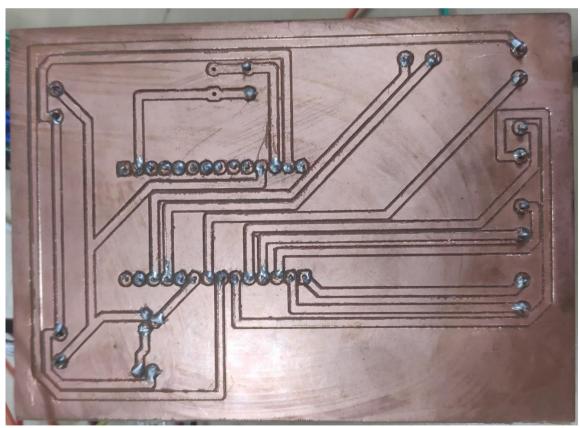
The CNC Milled Mother Node Copper-Clad Board
